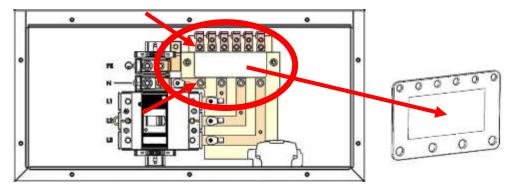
M6 and M8 socket head cap screws must be removed to remove plastic spacer plate
